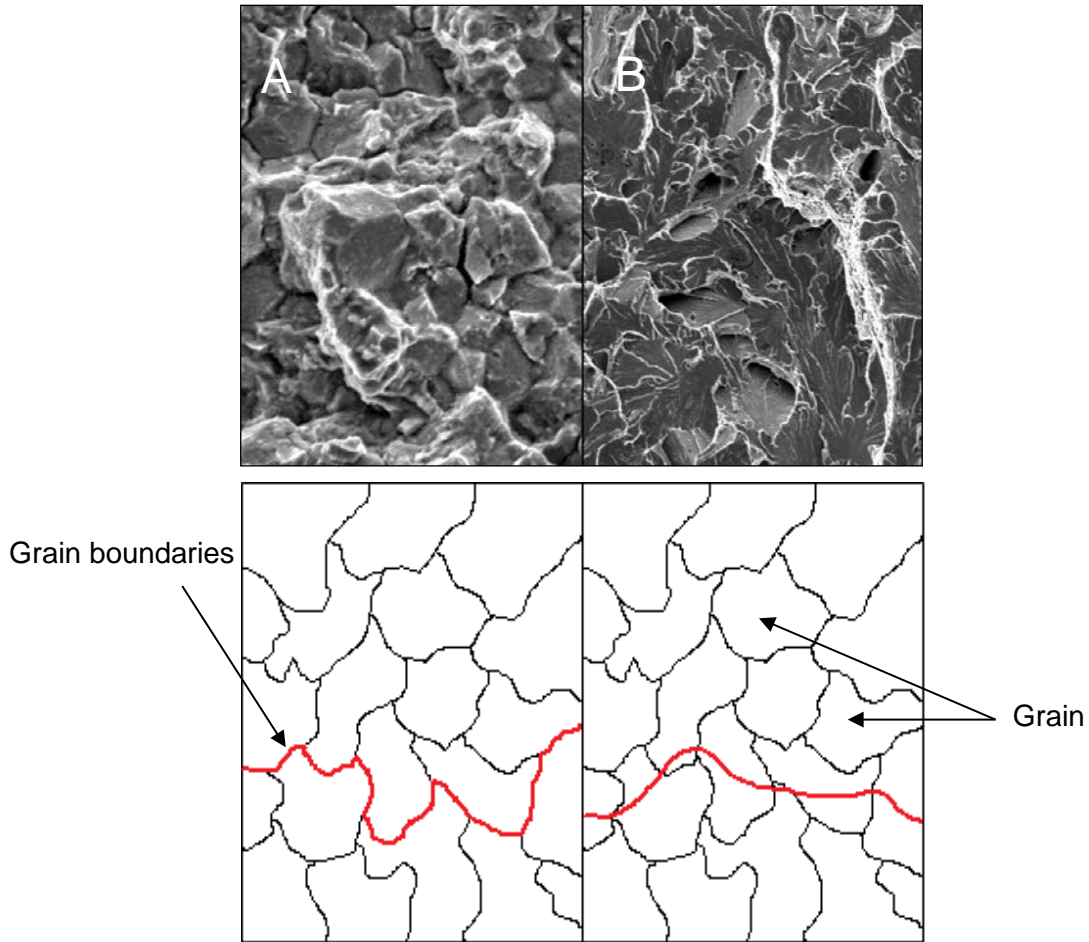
Schematic of two types of fractures a) intergranular fracture b) transgranular fracture
